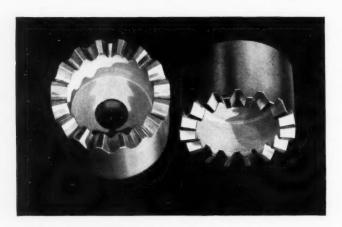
A Coupling having a 30degree Tooth Pressure Angle which is Used in Conjunction with an Electric Interlock to Limit Torque Transmitted by Power Drives
